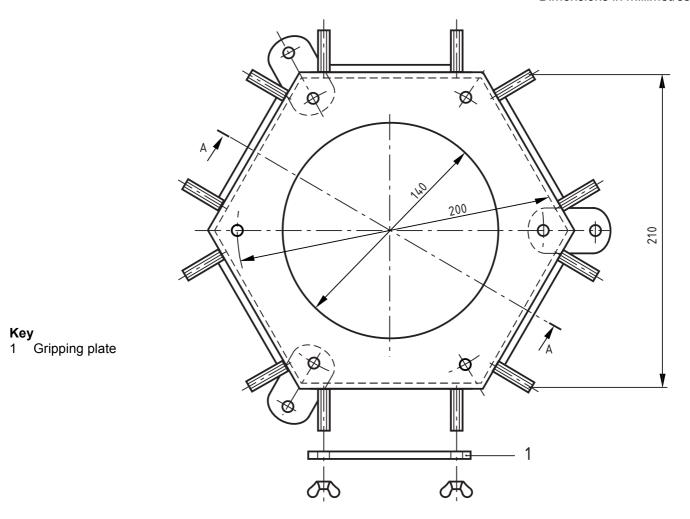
Top view of hexagonal vessel without lid and paddle stirrer
